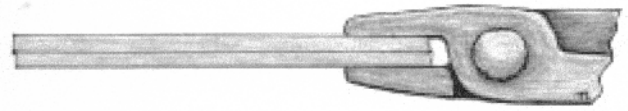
Bars for practice weld— no alignment of scarfs.
